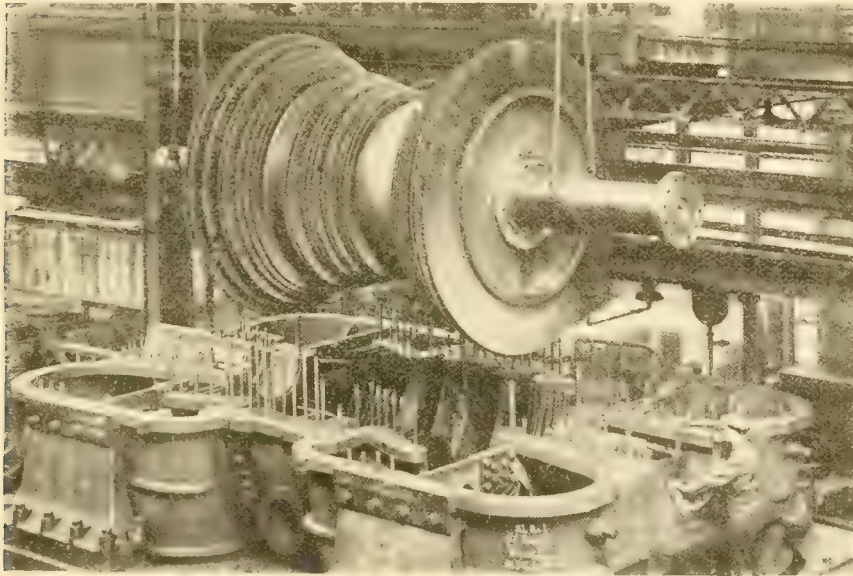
LOW-PRESSURE ROTOR BEING LOWERED INTO LOWER HALF OF STATOR
